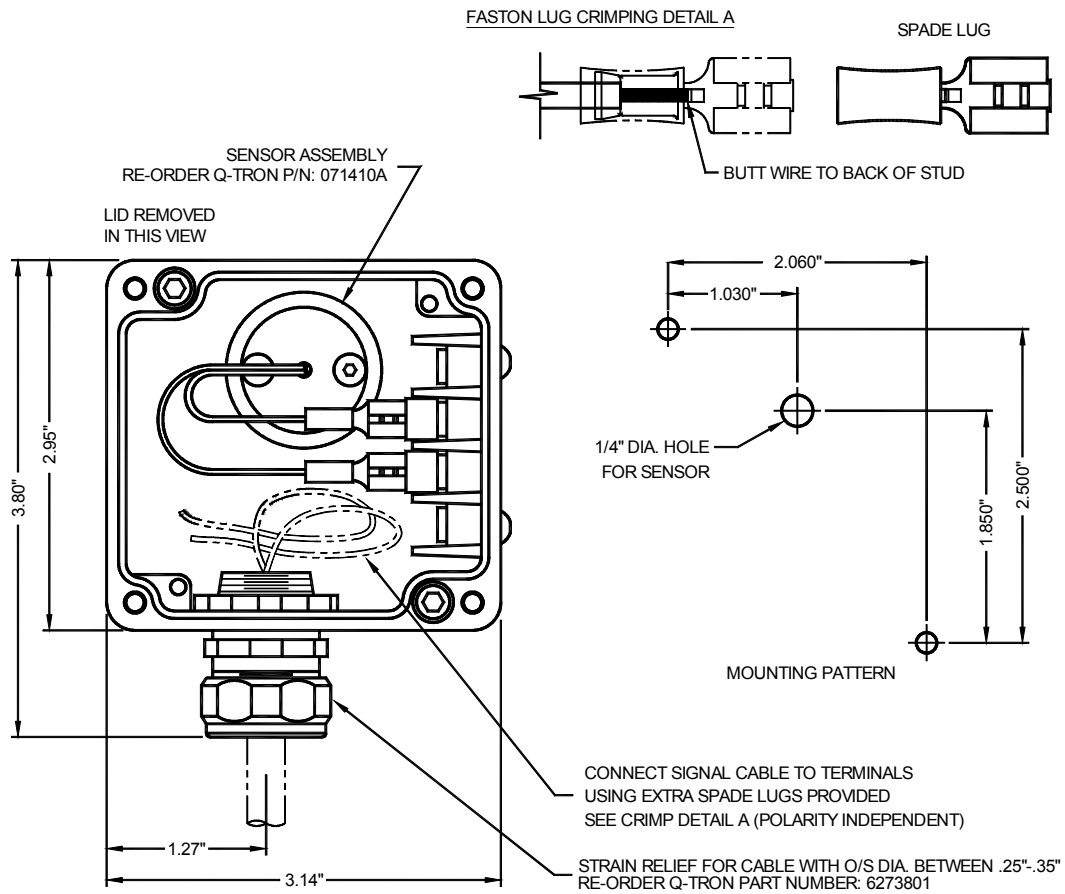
TM Cooling Air Temperature Sensor assembly mounting guide
